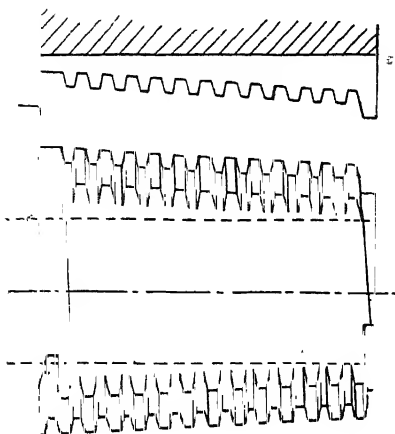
Quick-engaging screw, flats milled first, then threads.
